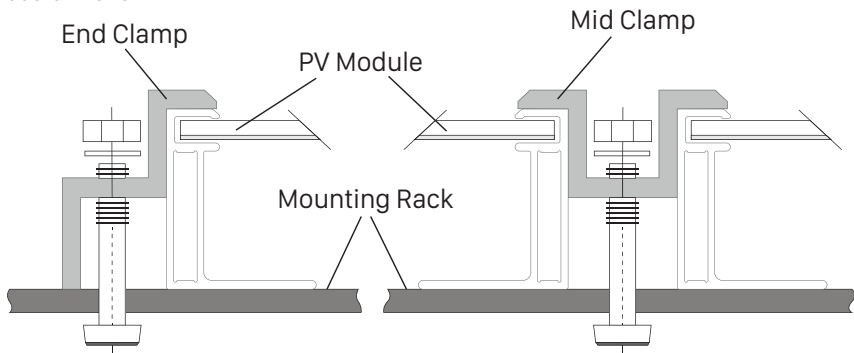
Clamping mounting method/ Méthode de montage par serrage
